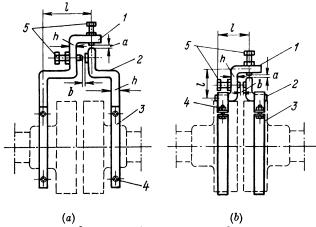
Alignment fixtures. General arrangement (a) fixture to be mounted on the half-coupling hub; (b) fixture to be secured on the half-coupling rim; 1 and 2 — fixtures; 3 — clip; 4 — fastening bolts; 5 — metering bolts
